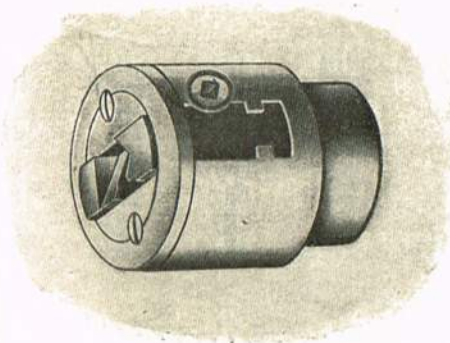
MILLERS FALLS THREE-JAW CHUCK.
